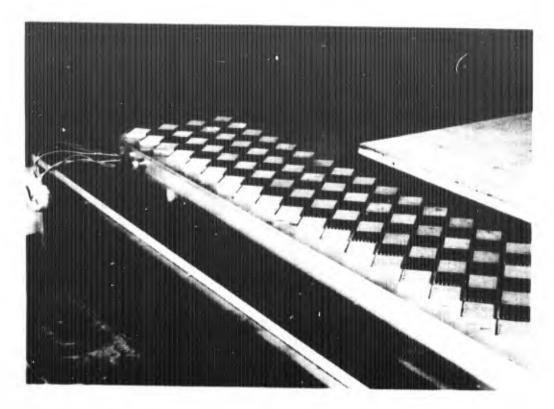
Cushion Forming Die Closeup (Photo 4R11803)
